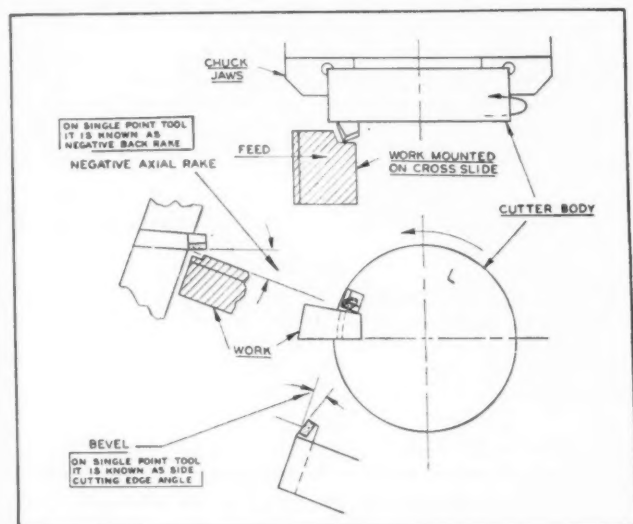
IMPROVED TYPE OF FLY-FACE MILLING CUTTER SET UP IN LATHE TO STUDY ACTION OF CUTTING EDGE ENTERING WORK
